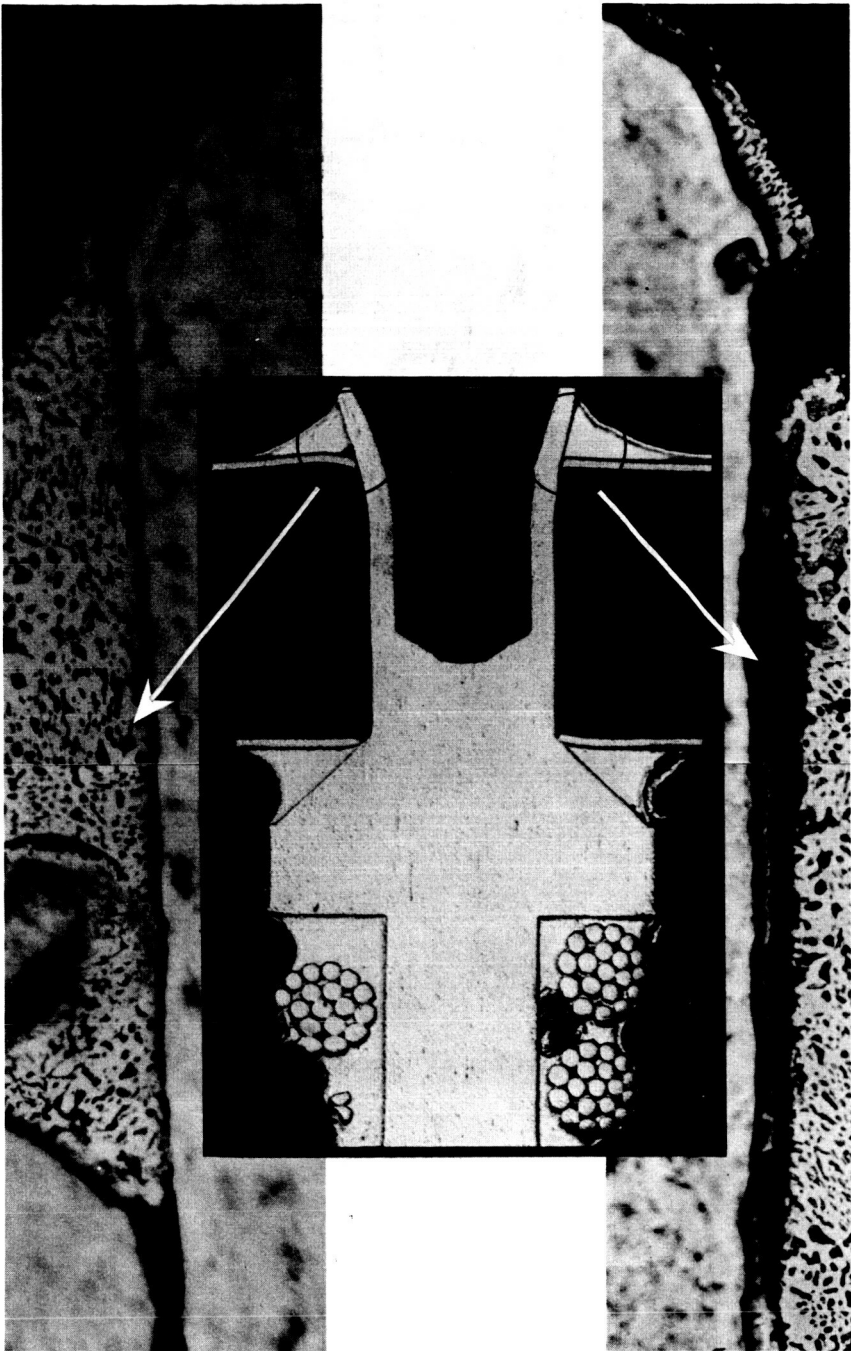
Microphotograph of solder crack adjacent to swaged terminal.
